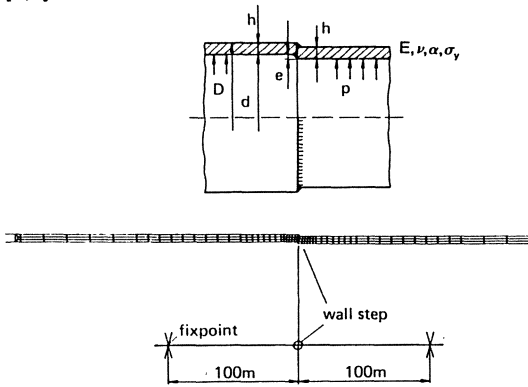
The welded pipe connection with a wall step within tolerances, see Fig. 14.
